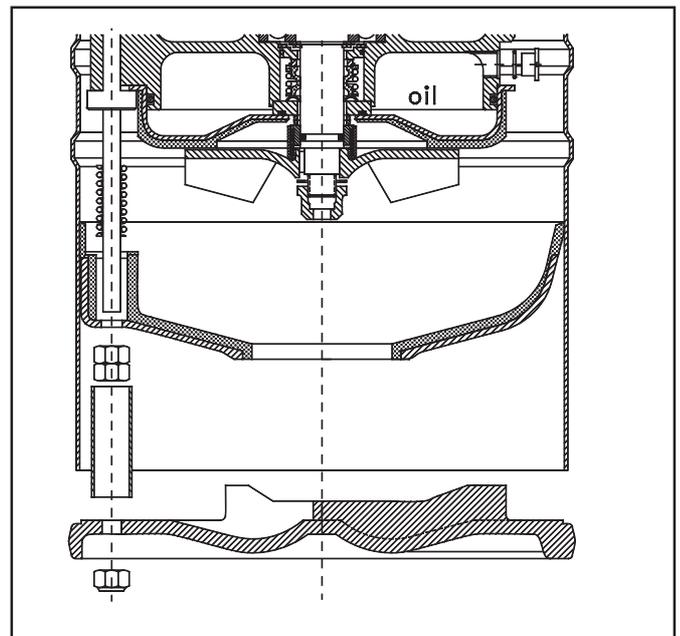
Removing base plate, diffuser and cooling jacket, oil draining.
